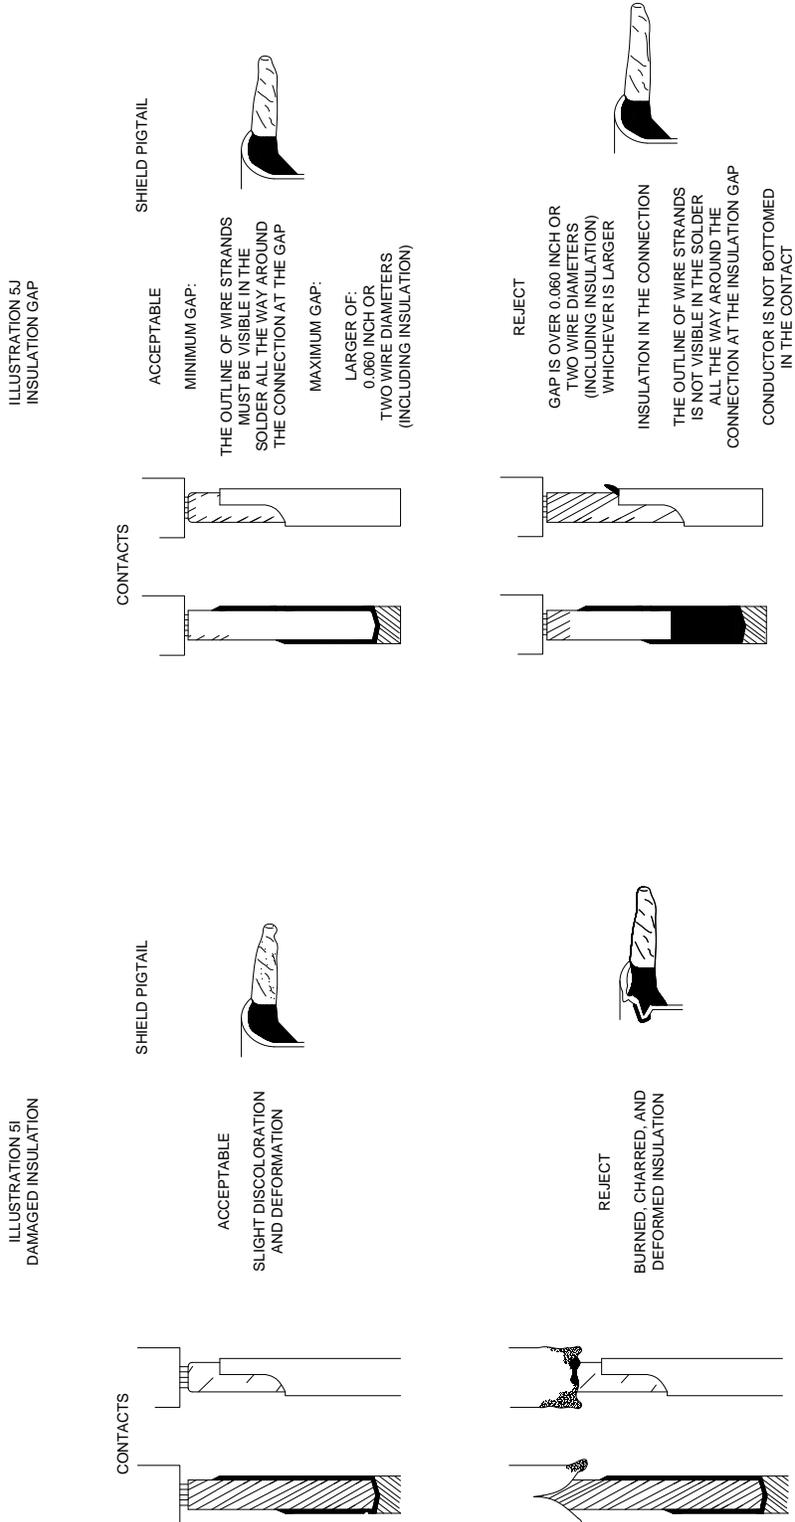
A6. Conductor contact soldering techniques - Continued.
